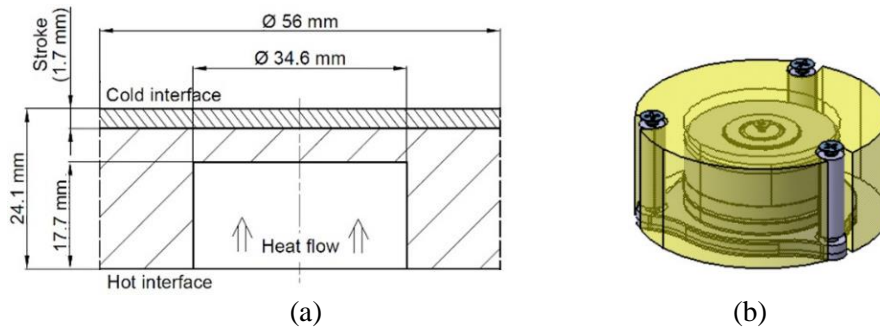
FTS design space available; (a) design space geometry cross-section [25]; (b) ISO view
